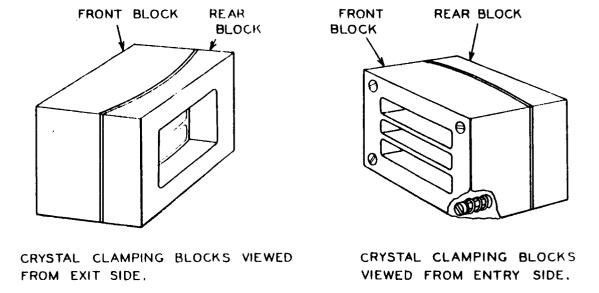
The stainless steel clamping blocks for bending the crystal. A rubber gasket is placed between the rear block and the crystal.
